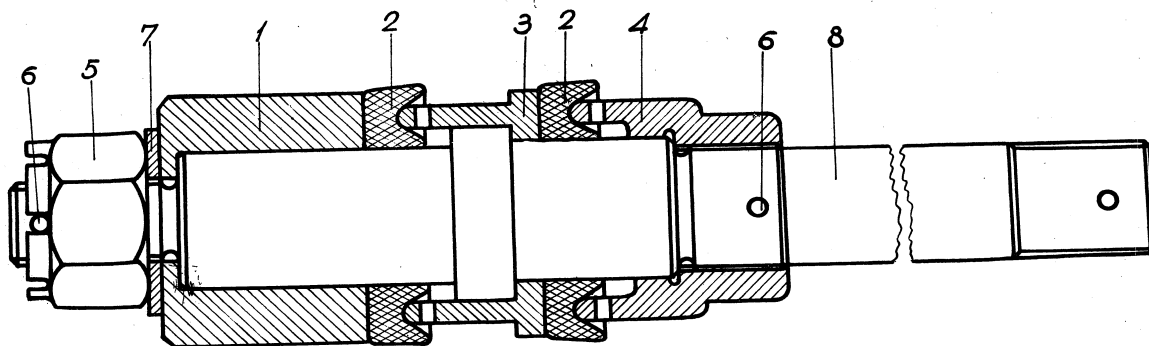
RECUPERATOR PISTON — ASSEMBLY
